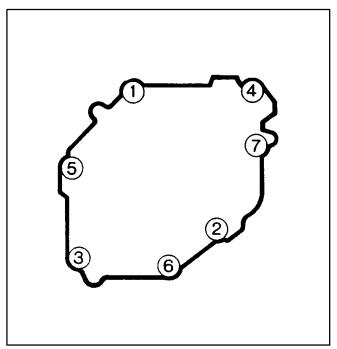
GEAR COVER TORQUE SEQUENCE
